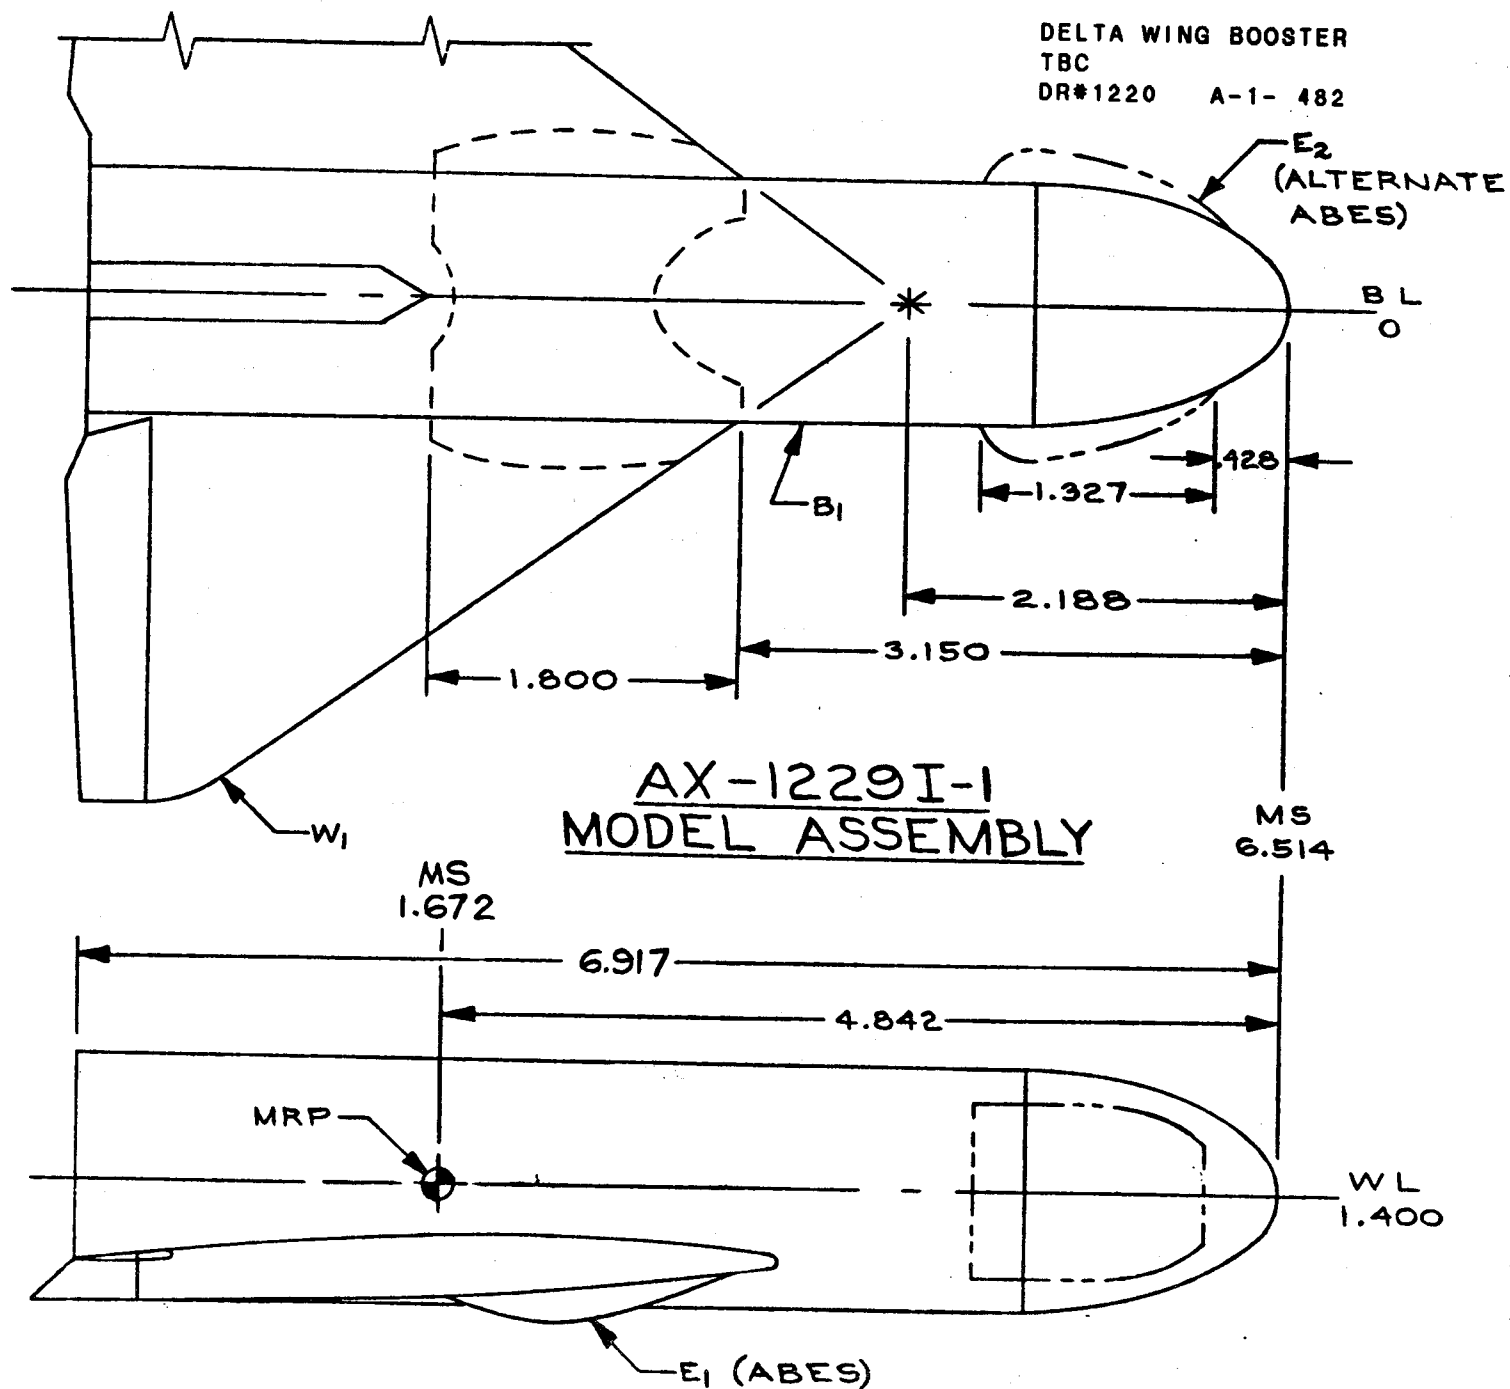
I-1 MODEL ASSEMBLY
